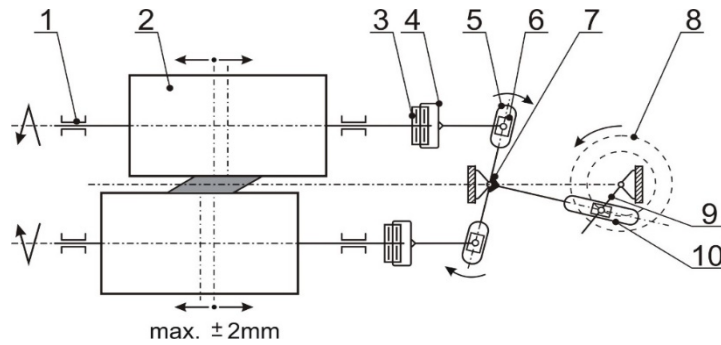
Scheme of the setup of RCMR. 1. Bearing, 2. Working roll, 3. Thrust bearing, 4. Housing, 5. Yoke, 6. Stone sliding, 7. Swivel, 8. Eccentric bush, 9. Eccentric shaft, 10. Stone sliding
